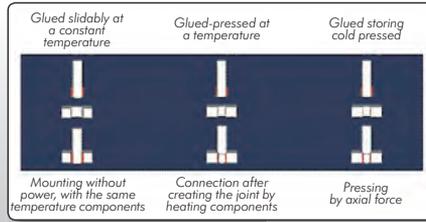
Kinds of gluing of cylindrical joints [www-1]
